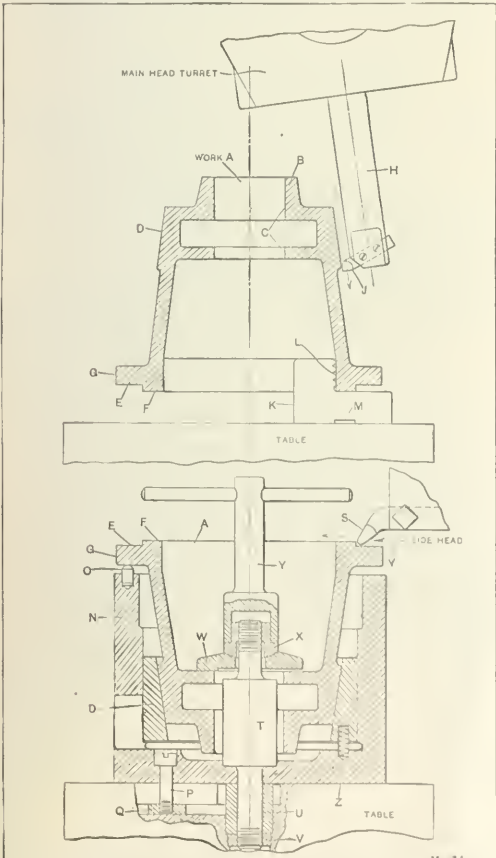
Two Settings of Work for machining Surfaces B, C, D, E, F, and G
